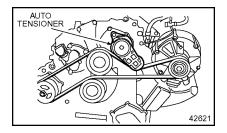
Auto Belt Tensioner Assembly with 50 DN Alternator
